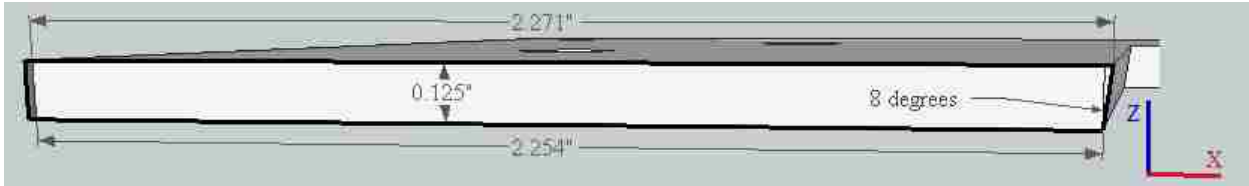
Cross sectional view of the 20x20 cm² upper trimmer aluminum plate in the cross-plane dimension illustrating the thickness and lateral dimensions of the plate.
